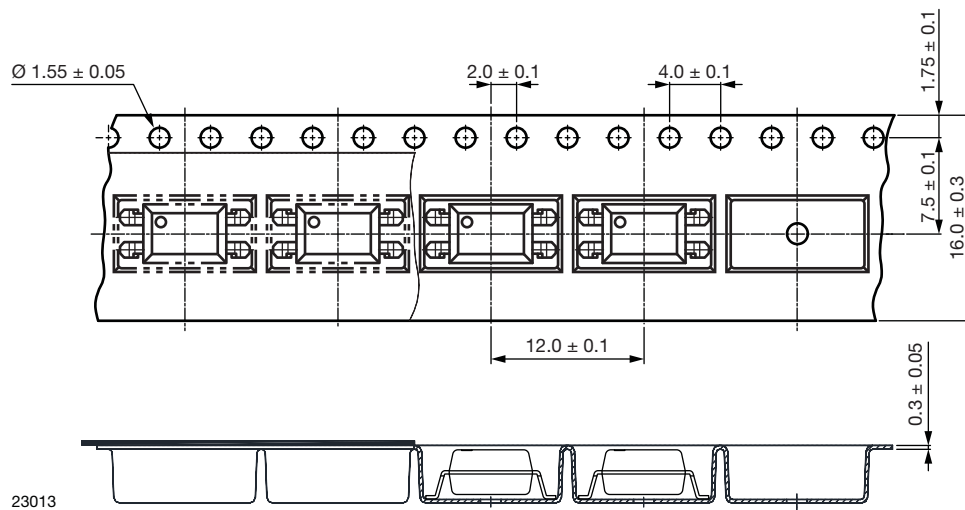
Tape and Reel Packaging (1000 pieces on reel)
